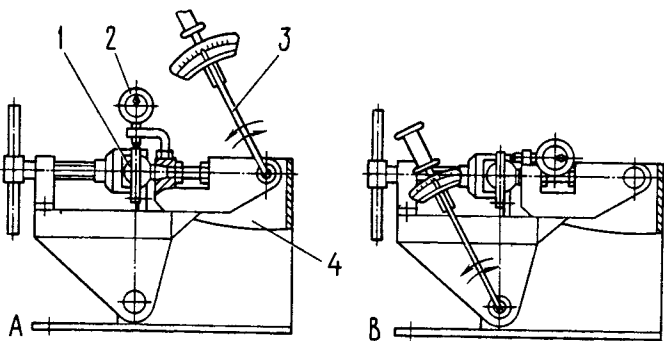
Checking Ball Joint on Gauge 02.8701.9502:
